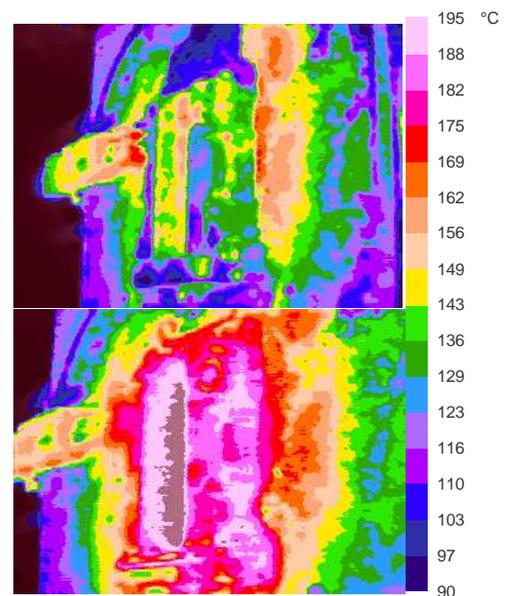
Working process. Thermographs. The fixed part of the die-casting die: working surface and casting (above), working surface without casting (below)
